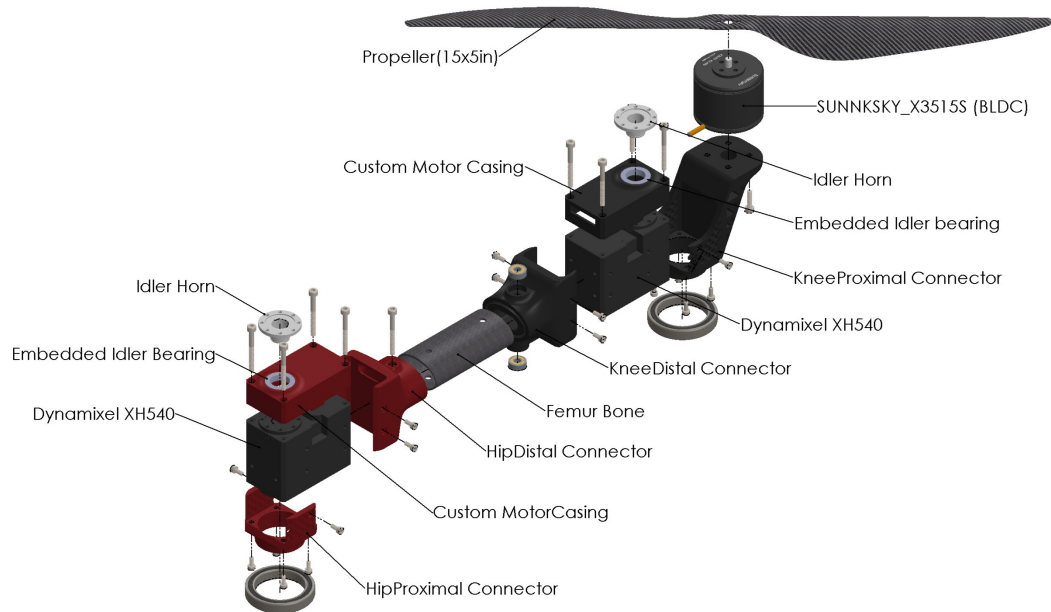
Shows the exploded view of the Upper Leg Assembly.
